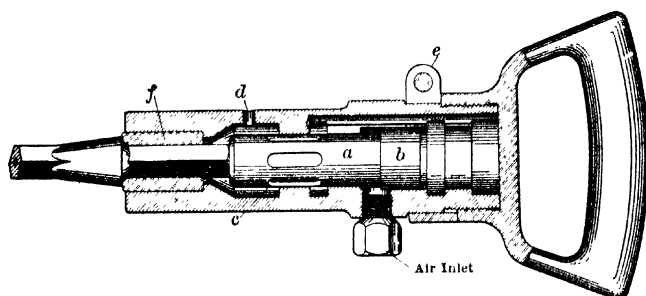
Ingersoll-Rand "Imperial" Hammer Drill (Types MV-1, MV-2).
